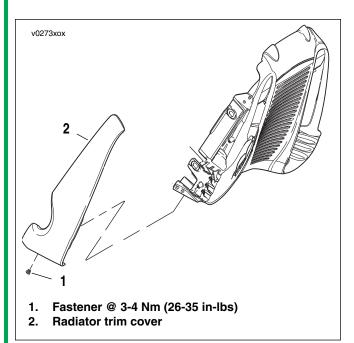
Removing Radiator Covers (VRSCA shown)
